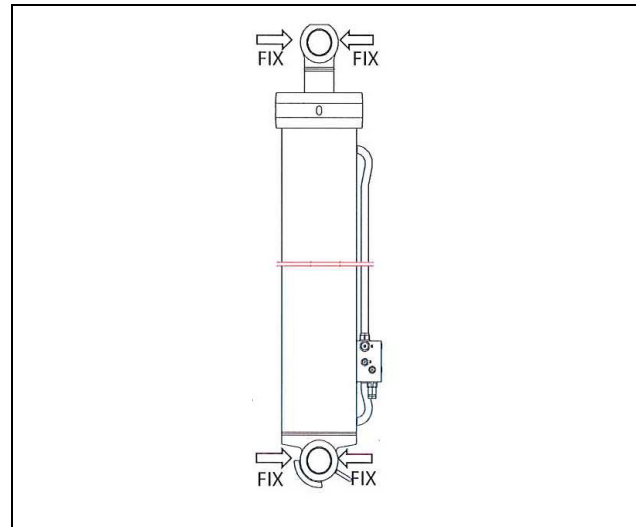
Fixing the Cylinder (Upright Level Cylinder)
